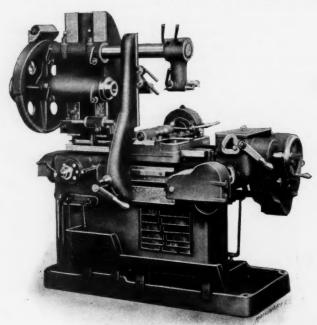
A New Cincinnati Gear-cutting Machine, of a size well adapted to Automobile Work
